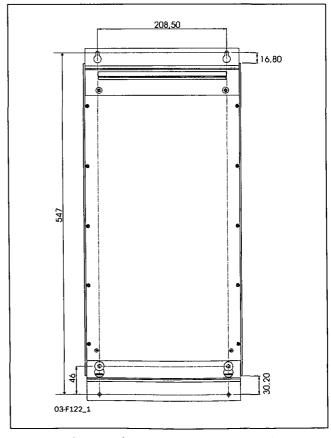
Hole pattern for MSF-170 to MSF-250 with upper mounting bracket instead of DIN-rail.
